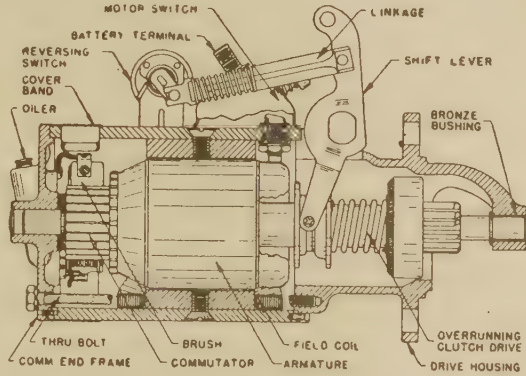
Delco-Remy Starting Motor, with Over-running Clutch Drive and Reversing Switch.
